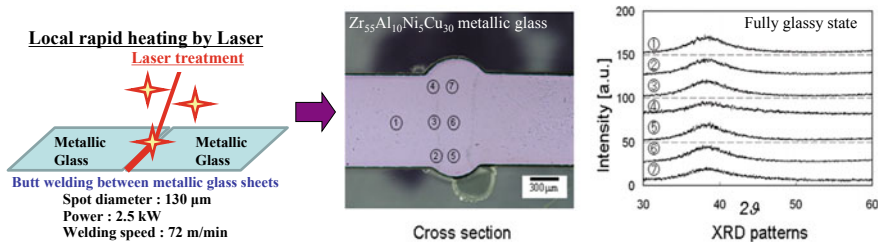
Fiber-laser butt welding of $Zr_{55}Al_{10}Ni_5Cu_{30}$ glassy alloy. Cross section and XRD results of weld bead produced at a welding speed of 72 m/min. Reprinted from Ref. [25], Copyright 2008, with permission from Elsevier
